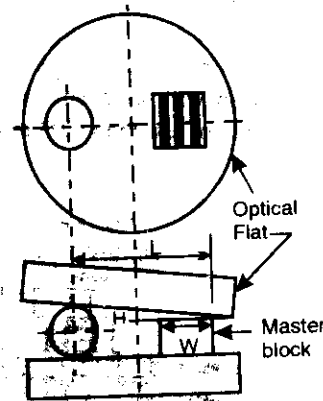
Method of measuring a ball using an optical flat and gauge block
